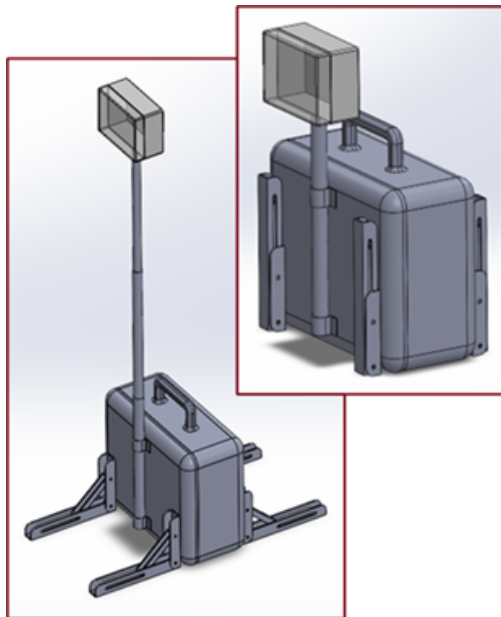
CAD drawing of proposed Gen 3 prototype.
